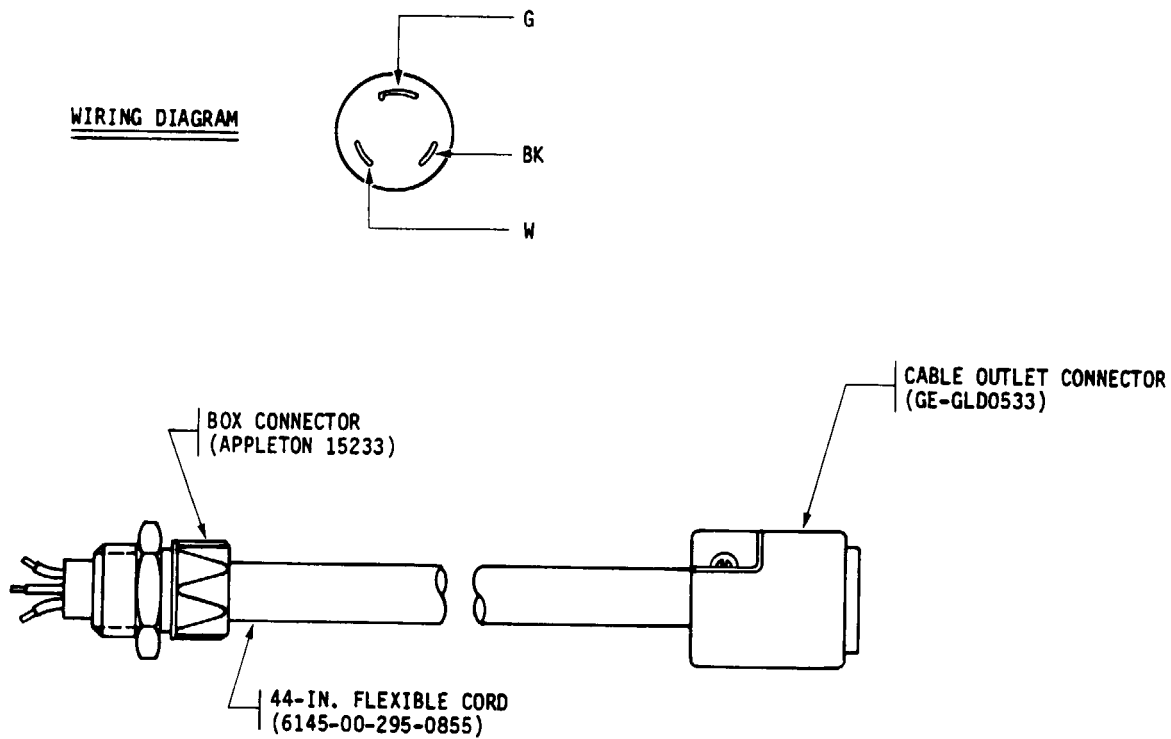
Power Cable Assembly, 11021163, Units 2 and 3, M35A2.
